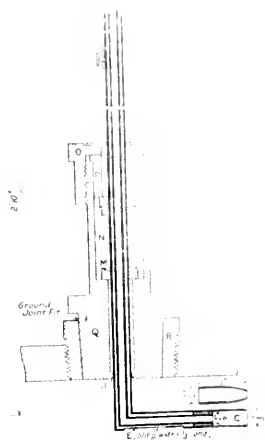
Section Through Pitot Tube and Stuffing Box, Used on Gas Main.
